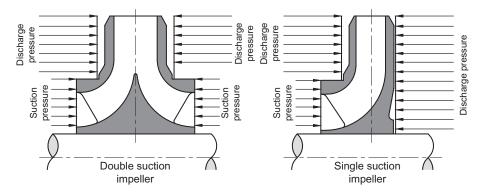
Orgin of pressure acting on impeller shrouds to produce axial thrust.
